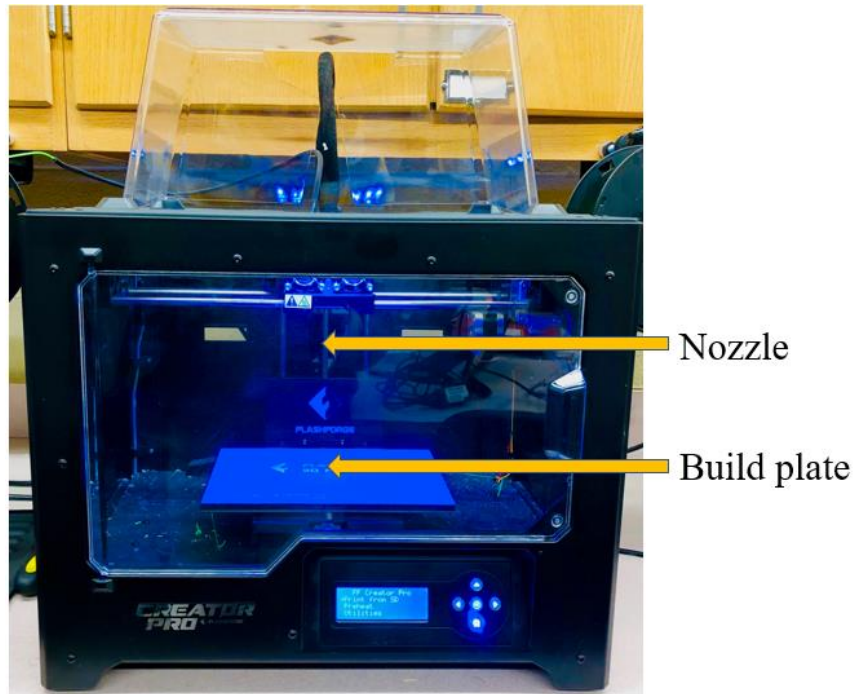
This Figure shows the location of Nozzle and Platform in the Flash Forged Creator Pro 3D Printer.
